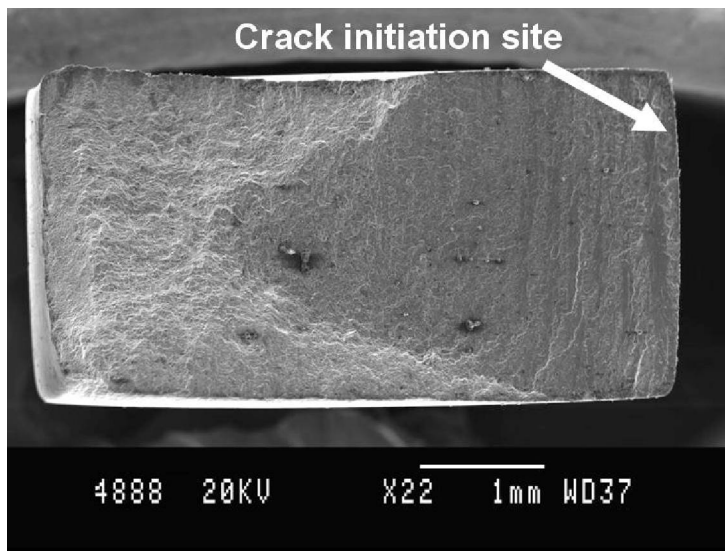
Cross section of fractured fretting fatigue test specimen.
